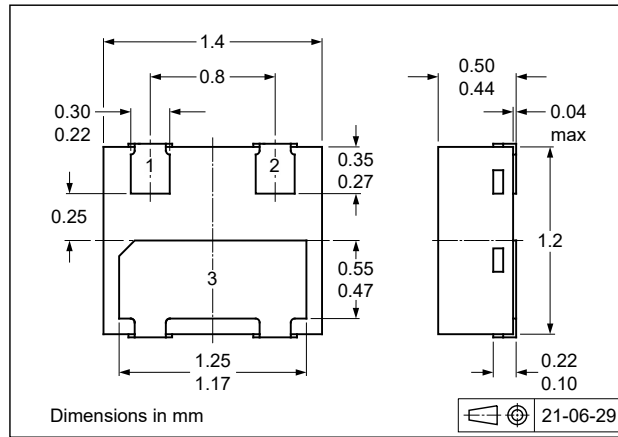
Package outline DFN1412D-3 (SOT8009)
